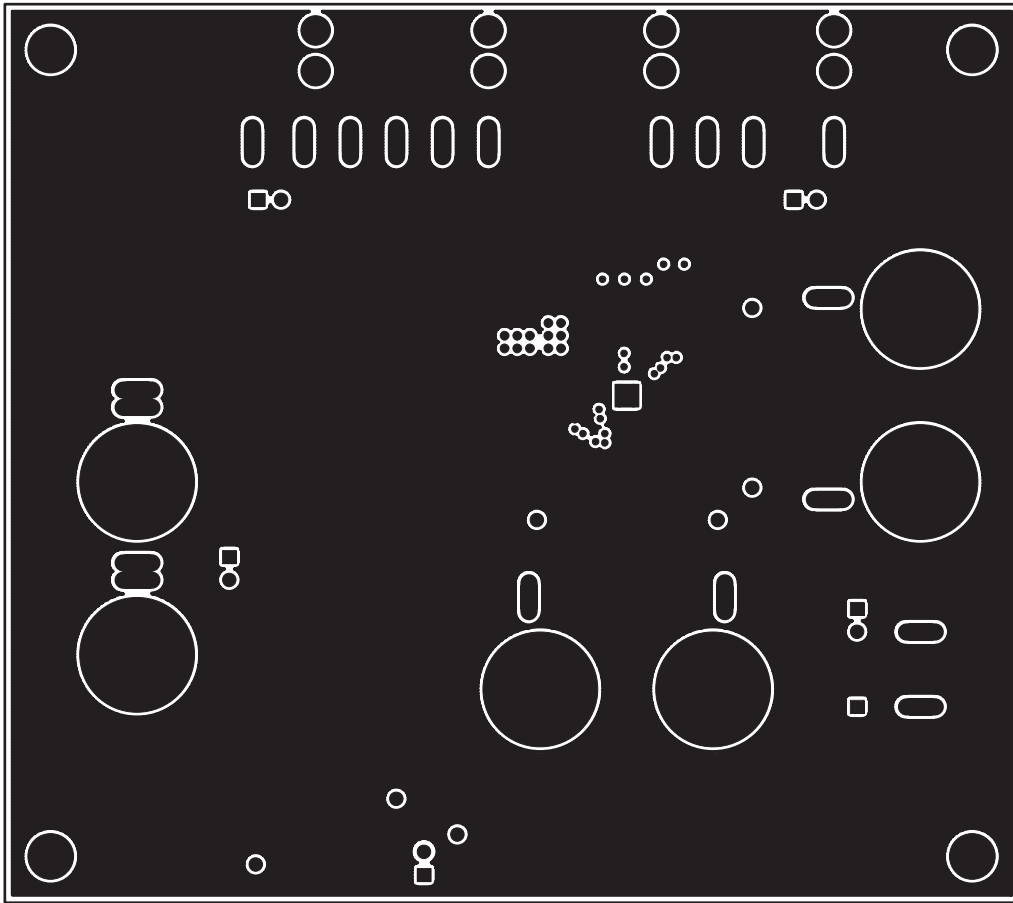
MAX9791A EV Kit PCB Layout—Layer 2
